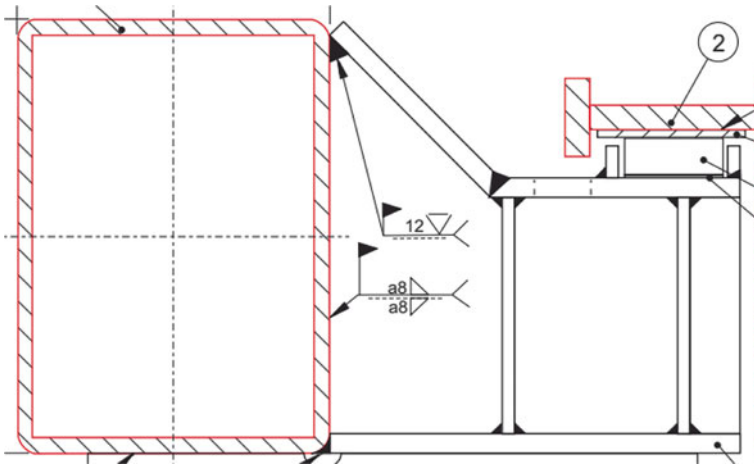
Convection sections support cantilever console installation with sliding pads under boiler hanging beam (labelled 2)
